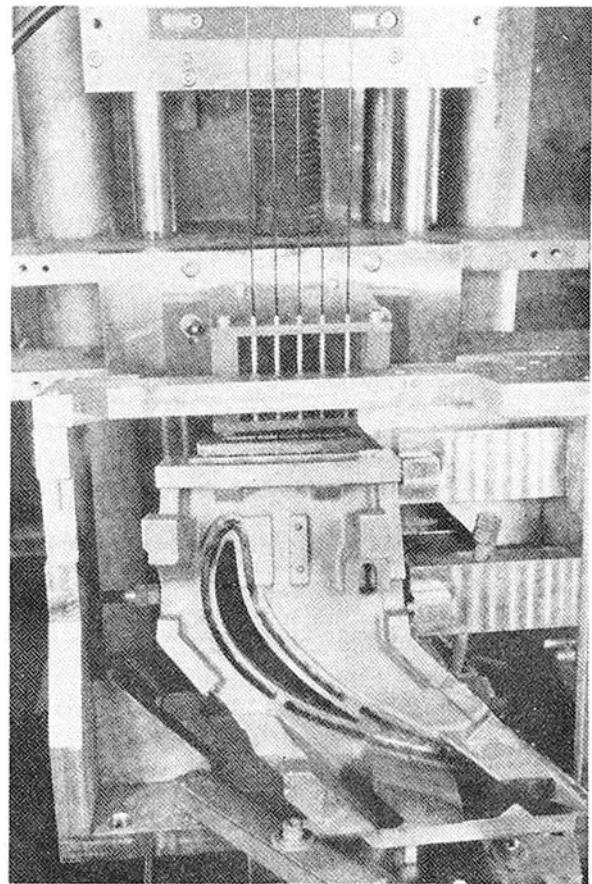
Second-stage nozzle STEM drilling setup for drilling five holes simultaneously
